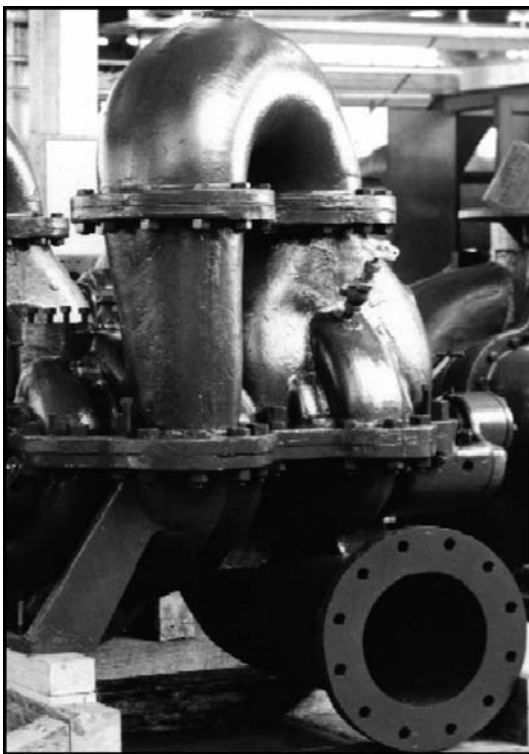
A BB3 pump with a flanged elbow in the cross-over.
